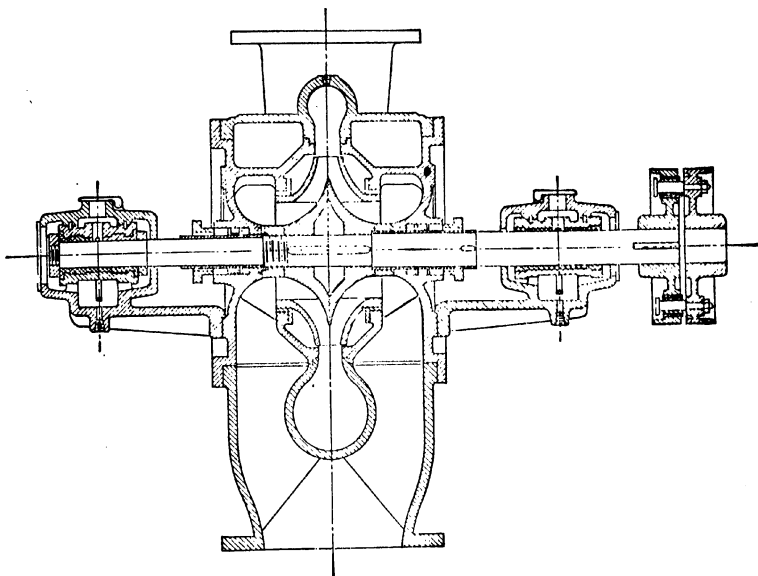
Single-stage centrifugal pump with double-suction impellers.
